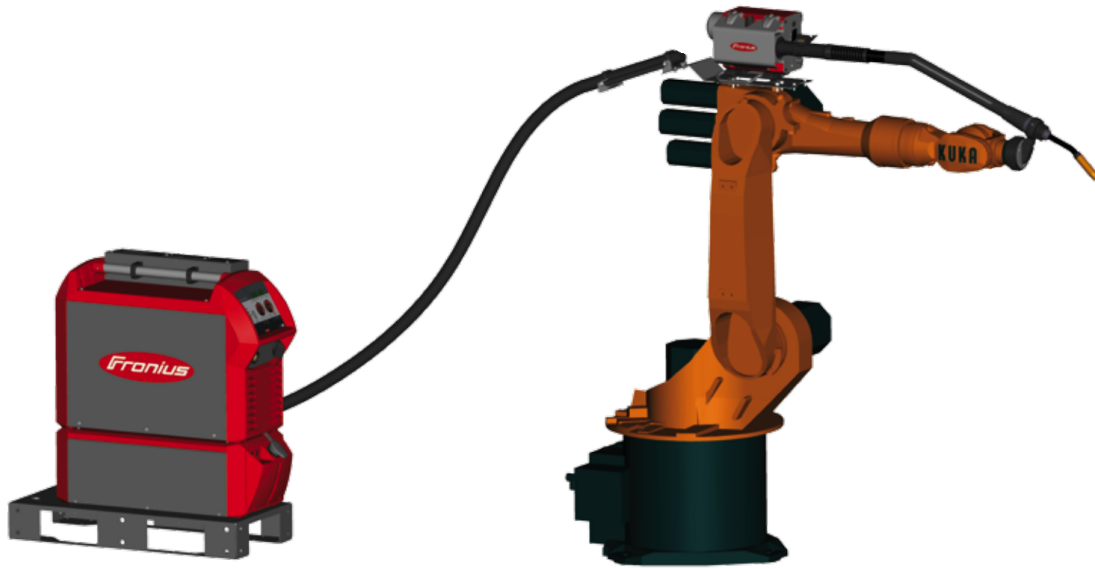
A model showing how the KUKA KR 5 robot is setup and connected to a Fronius TransSteel 5000 welding machine. Figure from [41].
